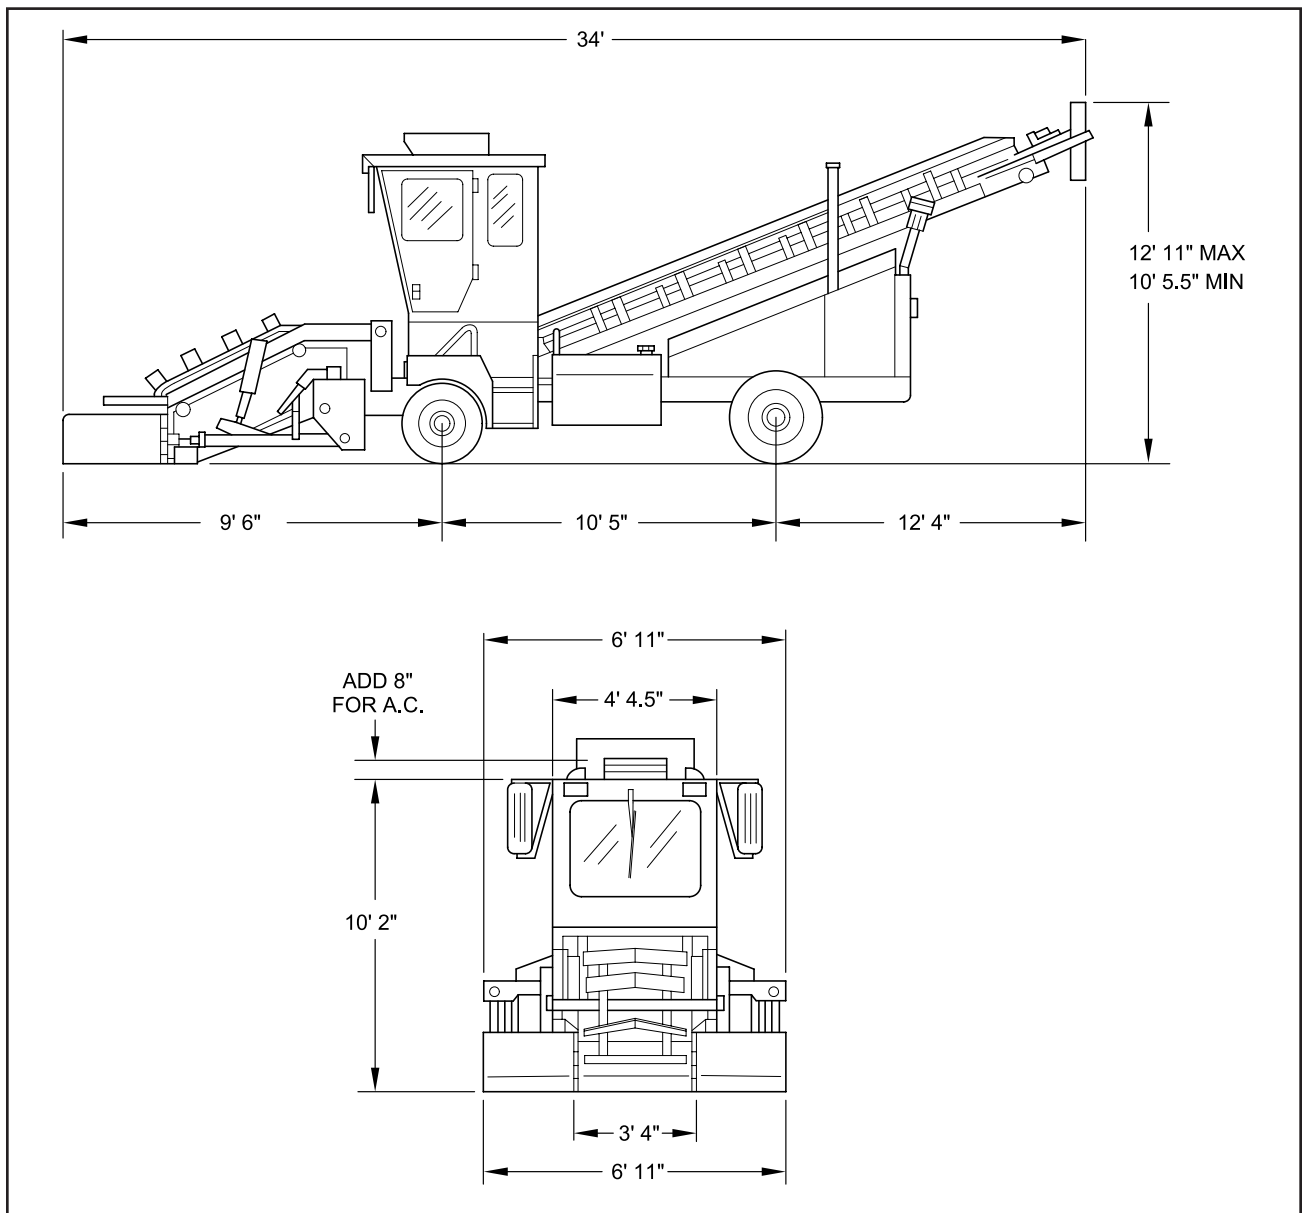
OUTLINE DIMENSIONAL DRAWING
